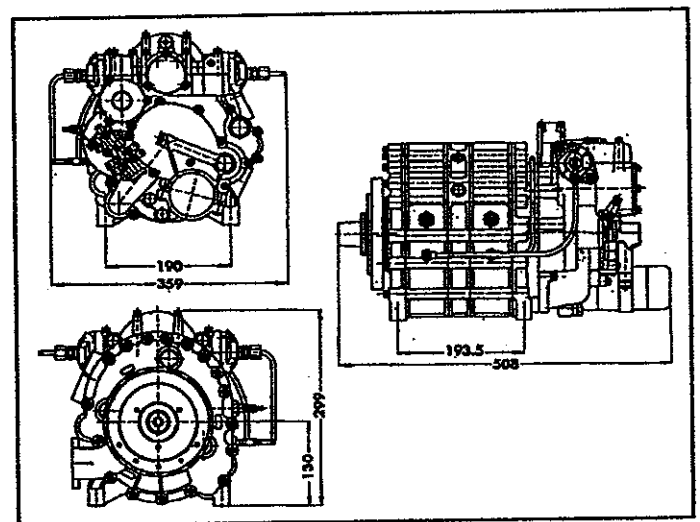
LCCR 800 TD twin engine, layout and dimensions
